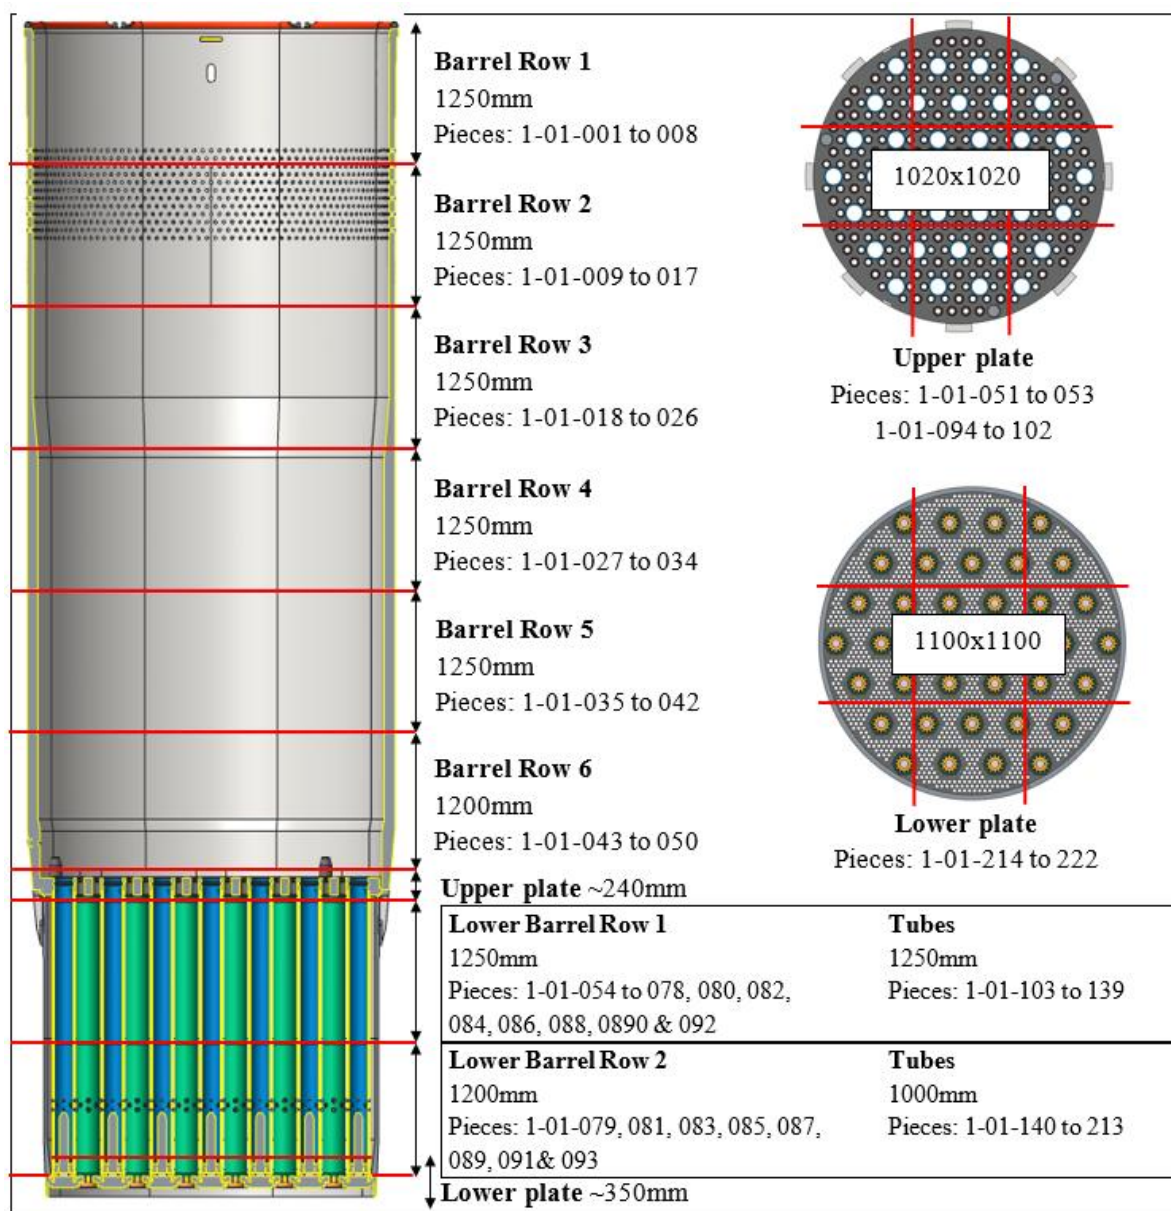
Cutting plan for the reactor bearing shell and its bottom fragmentation
